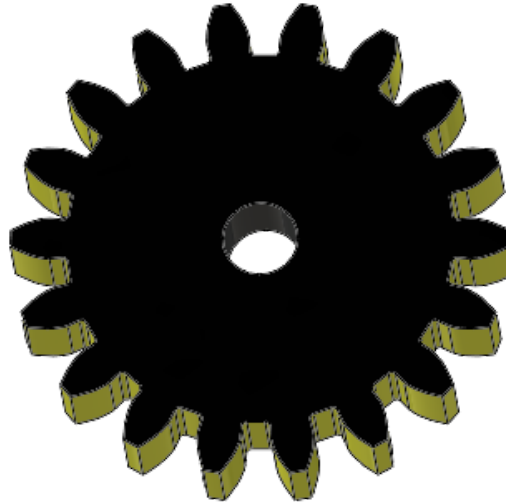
The yellow surface shows the machined part of the brass (the top and bottom faces of the gear are unmodified from the original gear blank).
